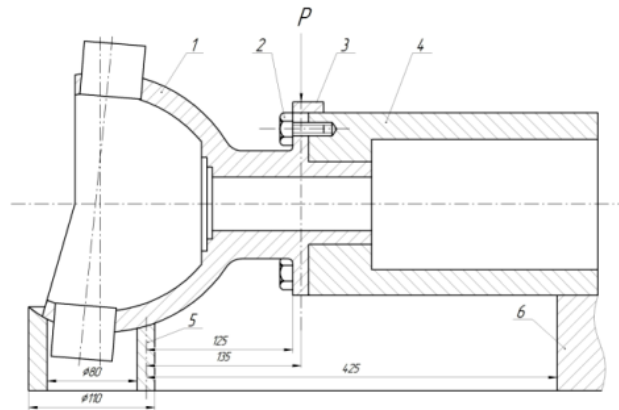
Load distribution in a ball joint: 1 – ball joint; 2 – fastening bolts; 3 – plate; 4 – pipe; 5 – pivot ring; 6 – rectangular-shaped bearing.
